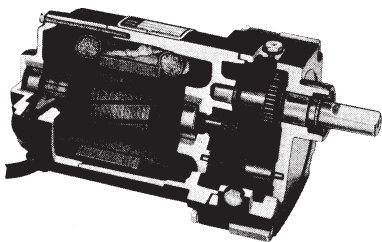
Cutaway of DC gearmotor showing magnetic structure.
